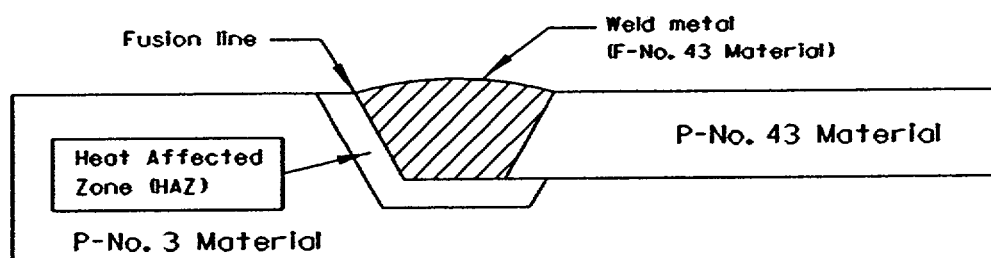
AUTOMATIC OR MACHINE (GTAW) TEMPER BEAD WELDING
